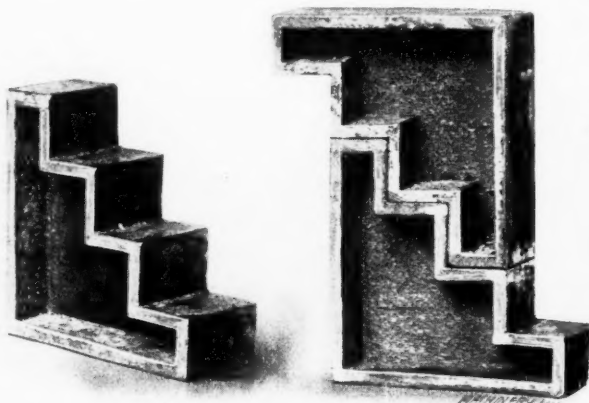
Adjustable Cast Iron Stepped Blocking.
